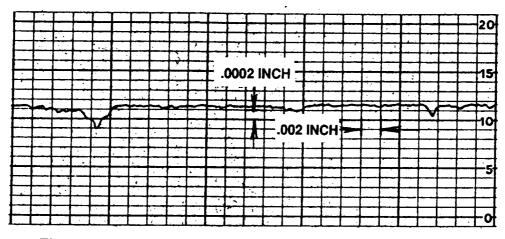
Profile of Turbine Bearing Journal Surface Along Shaft Axis
